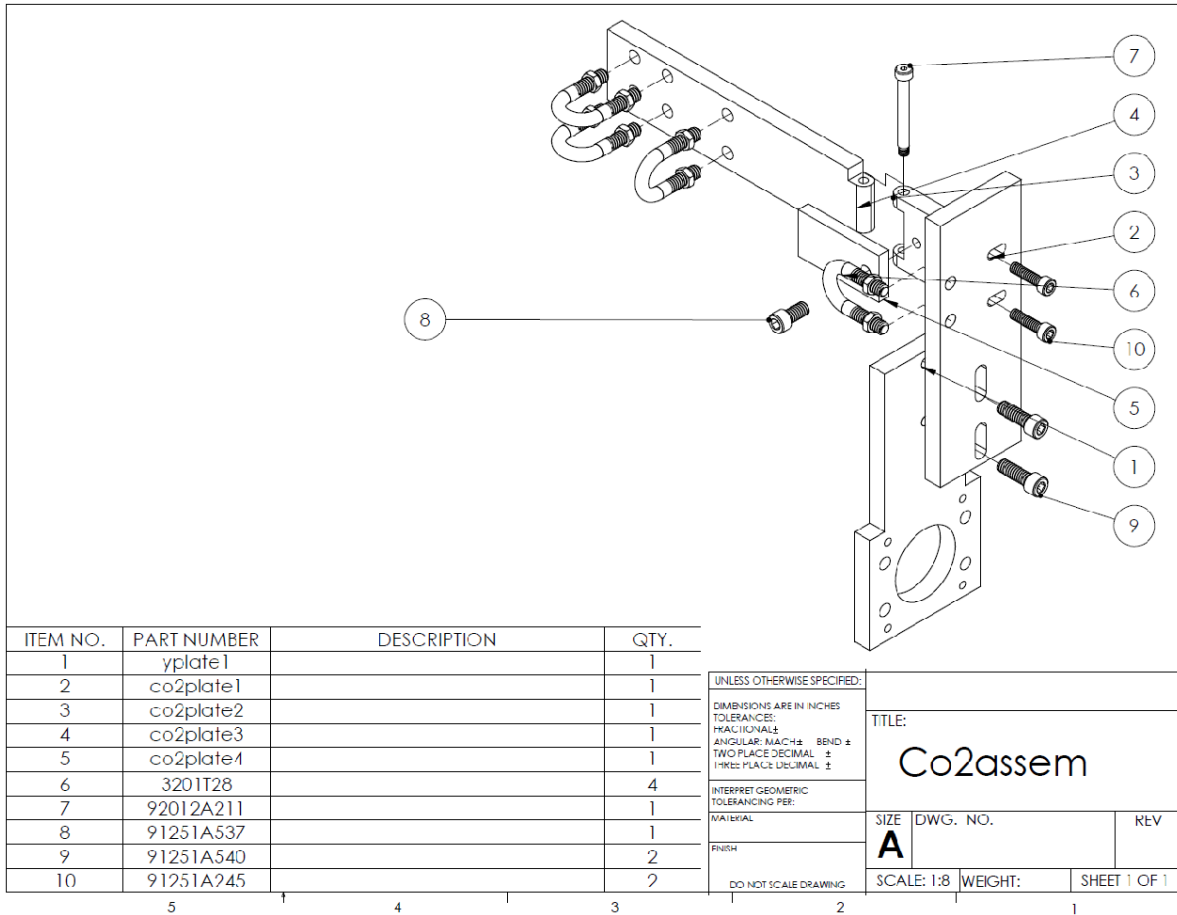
Assembly drawing of the supercritical CO₂ delivery system
